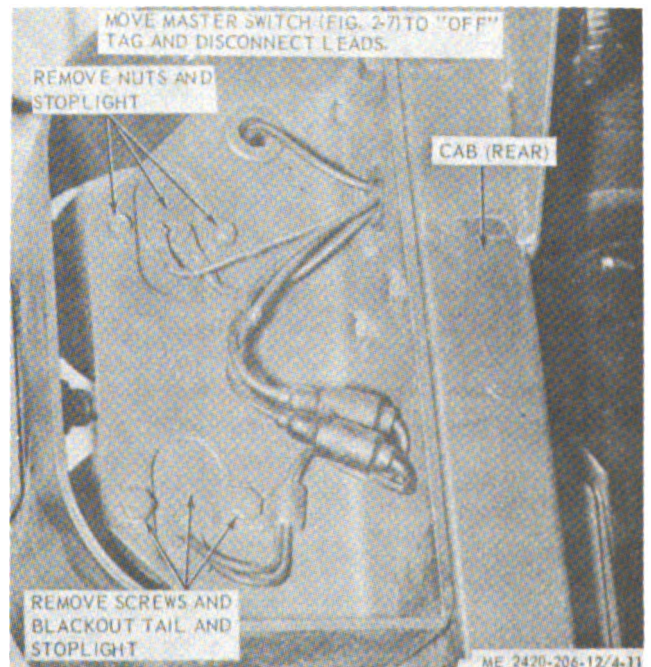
Tail and stoplight, blackout tail and stoplight assembly, removal and installation.
